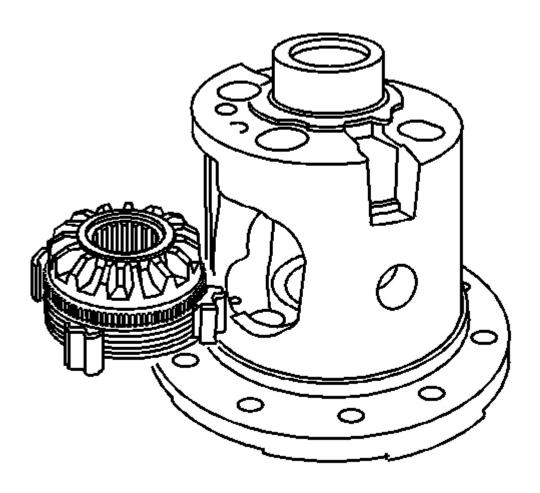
View Of Left Side Gear Cam Unit & Clutch Disc Assembly Courtesy of GENERAL MOTORS CORP.
